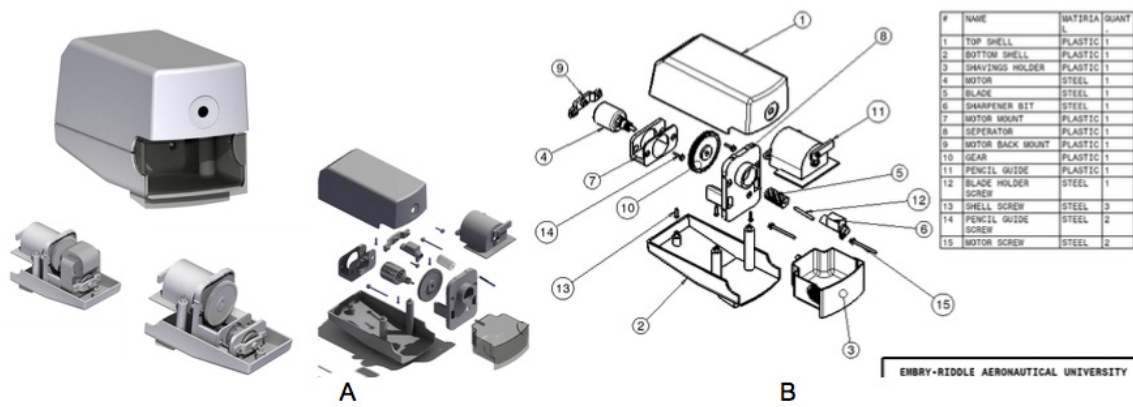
A: Rendered pencil sharpener with lighter and cheaper motor design, B: Exploded view of the pencil sharpener from 2013.
